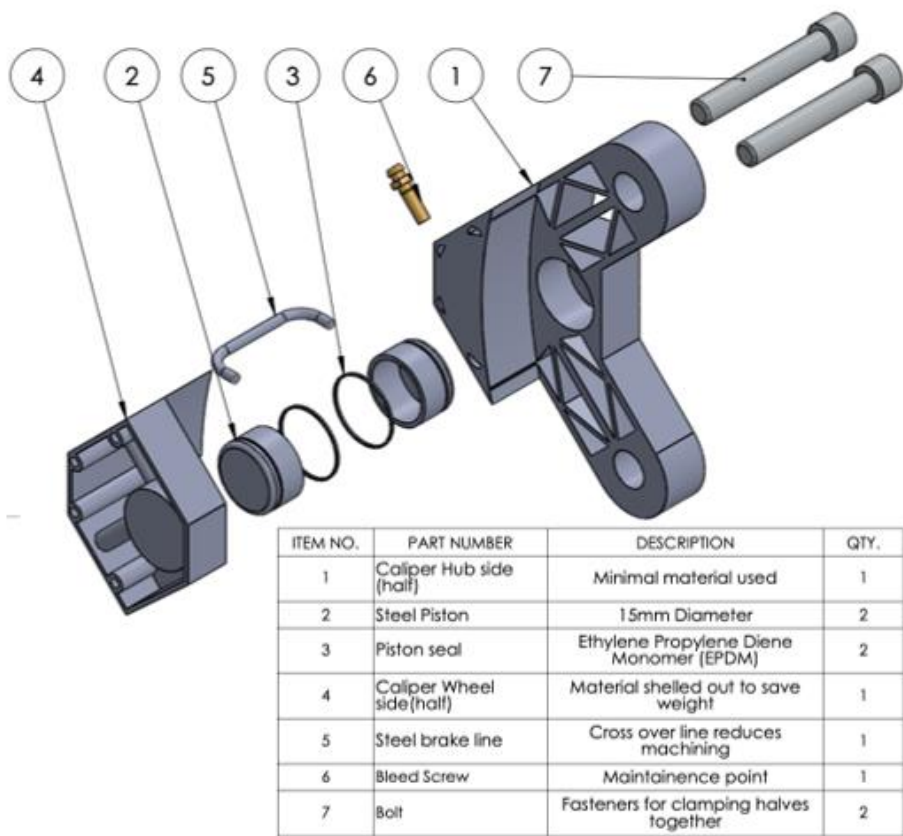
Exploded view of concept design 2 showing all the components with functional description.
